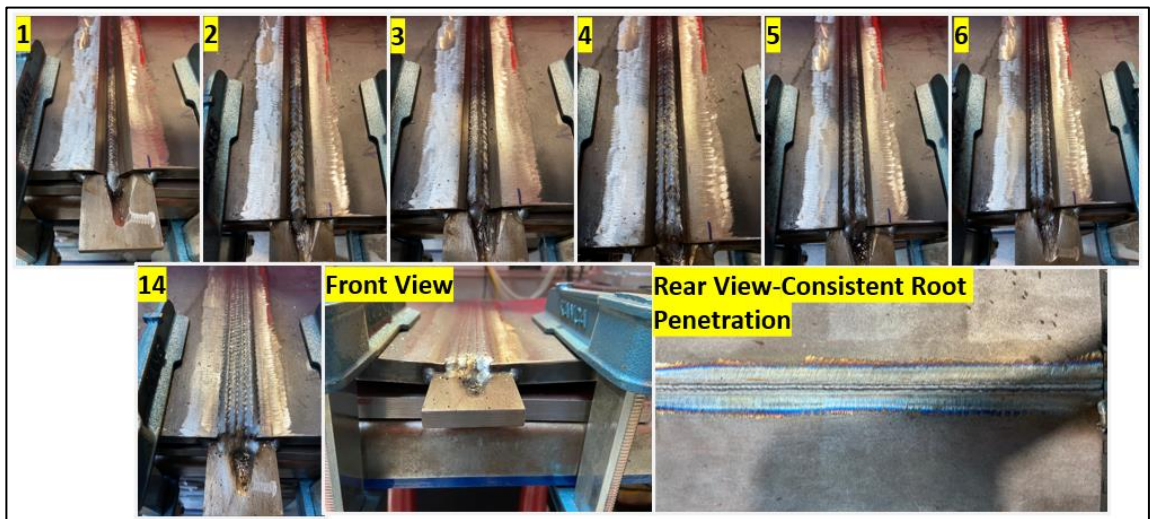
Multi-Pass welding system generated 7 welding passes based on cost function  $C(80\%,5\%,15\%)$  for weld joint 3
